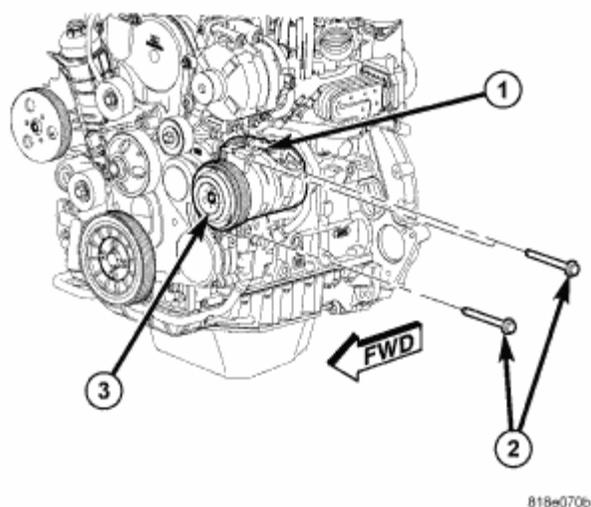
A/C Clutch Field Coil Connector, Bolts & A/C Compressor
